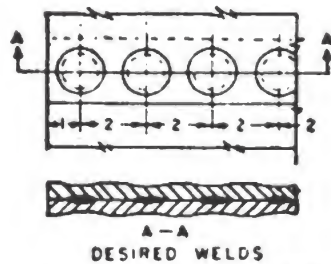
Pitch of spot welds shown on symbol.
